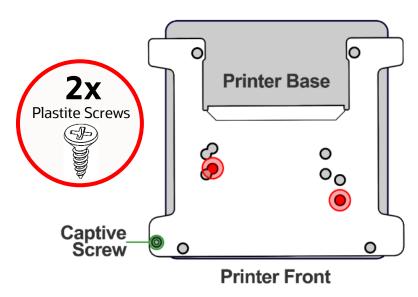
Mounting the Printer Locking Plate on the Bixolon SRP-350 PLUS III.
